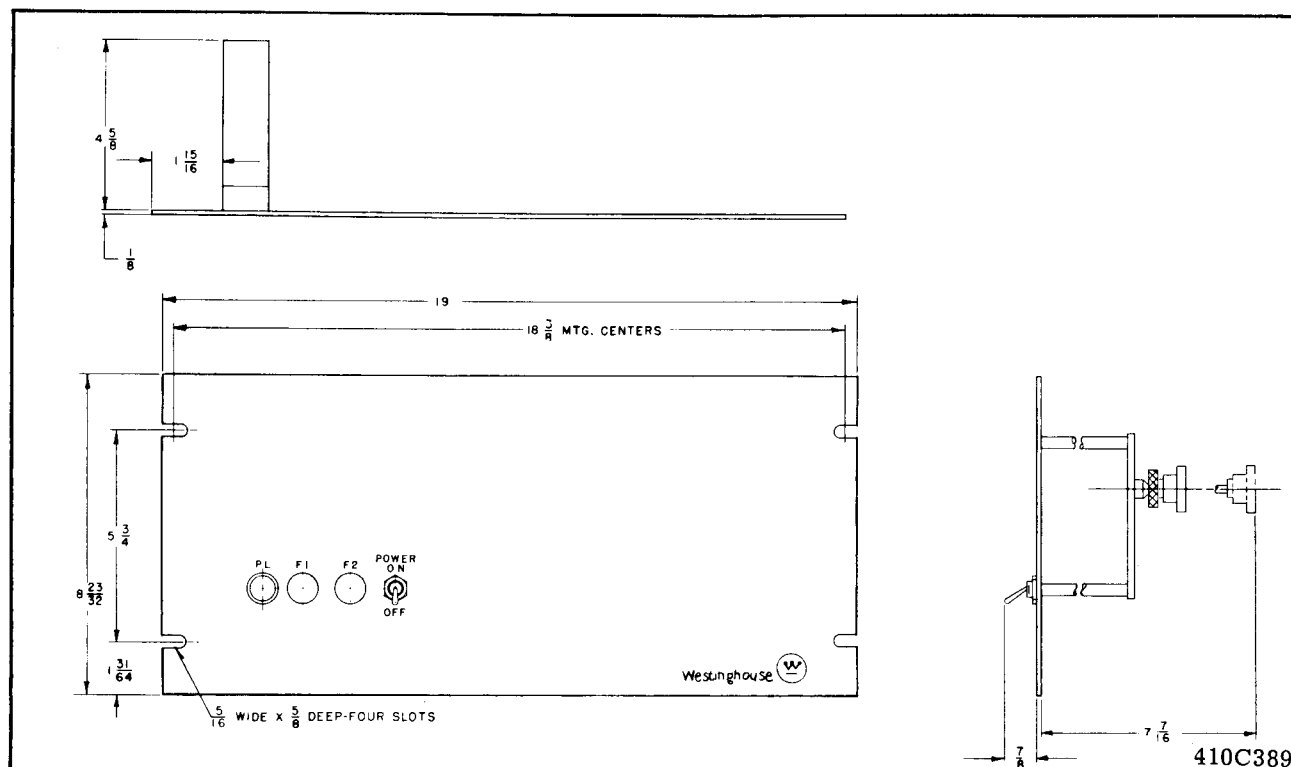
Outline and drilling plan for the type TCF transmitter assembly
